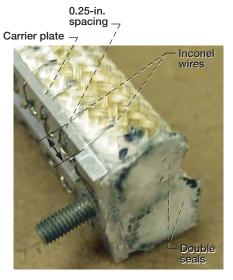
Double seals mechanically attached to carrier plate with Inconel wires for scrub testings. (Dunlap et al., 2002.)
